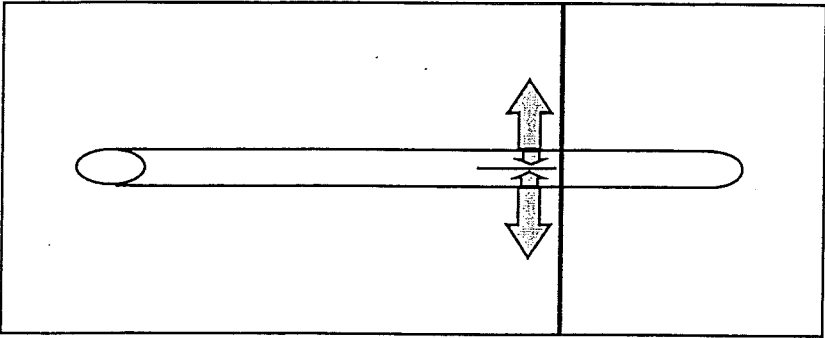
Schematic drawing indicating the expansion directions causing solidification cracking.
